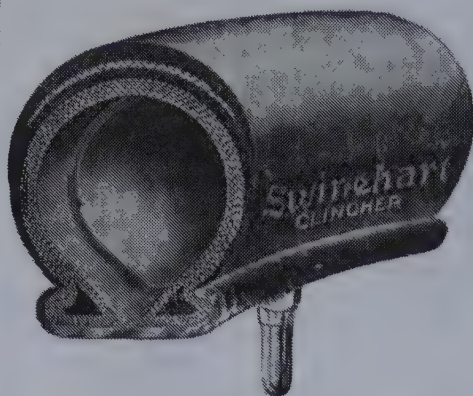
A Pneumatic Clincher Type of Double Tube Tire Mounted on a Regular Clincher Rim.
